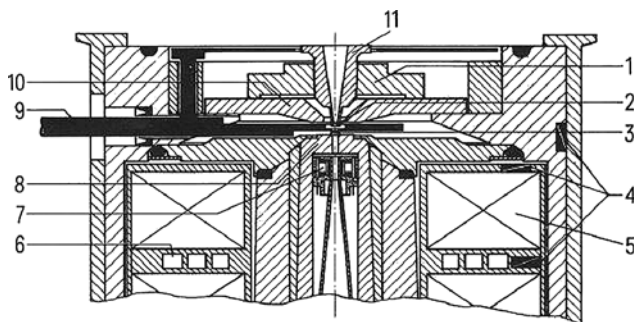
Schematic cross-section of the objective lens of the ELMISKOP 102: 1 specimen stage, 2 specimen, 3 aperture slide, 4 thermistors, 5 objective coil, 6 cooling water chambers, 7 objective stigmator, 8 bottom objective pole piece section (pole piece), 9 cooling rod, 10 top objective pole piece section (pole plate), 11 specimen cartridge in the working position
